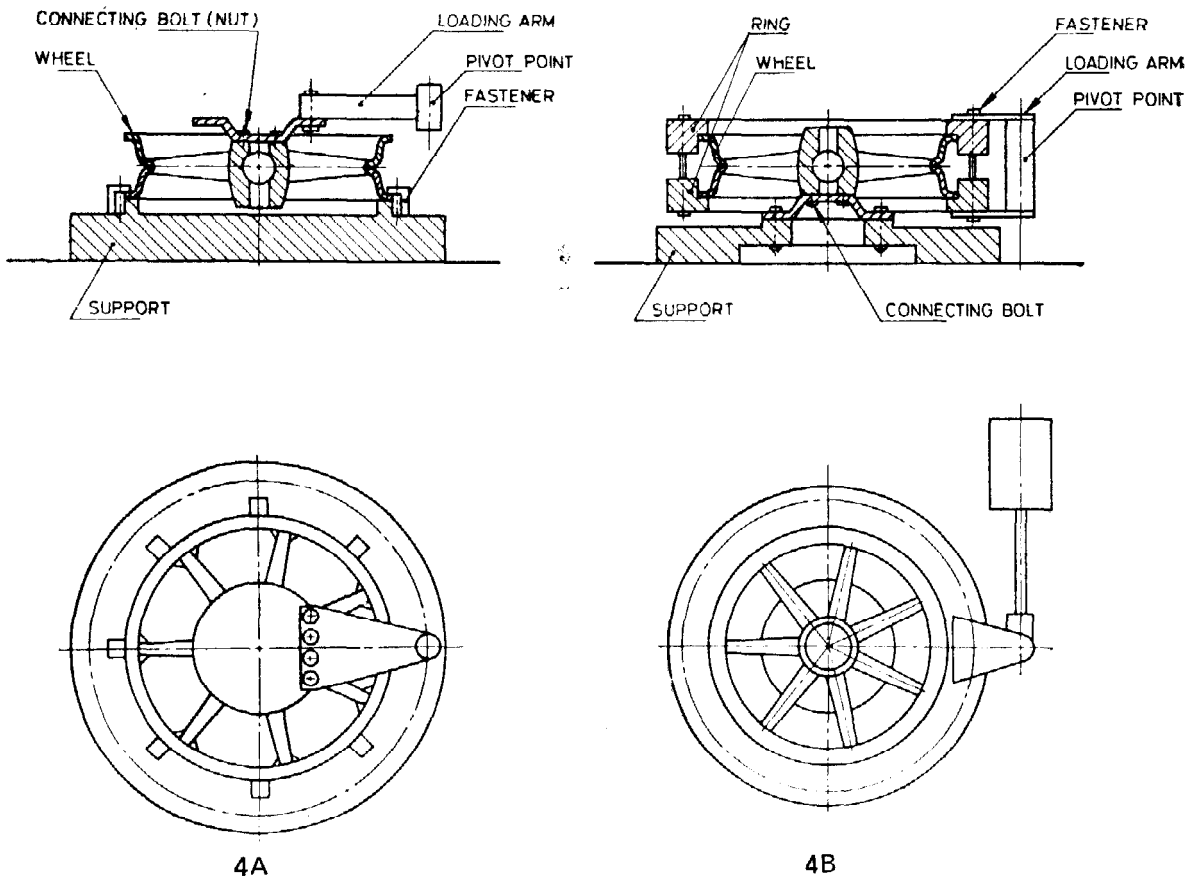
MODEL EQUIPMENT FOR TORSION TEST
